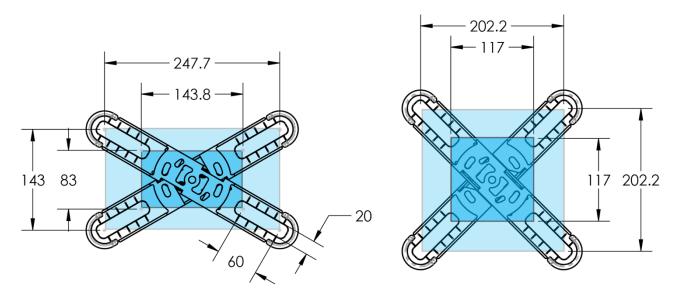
Technical Dimensions of Small Suction Cup Brackets
